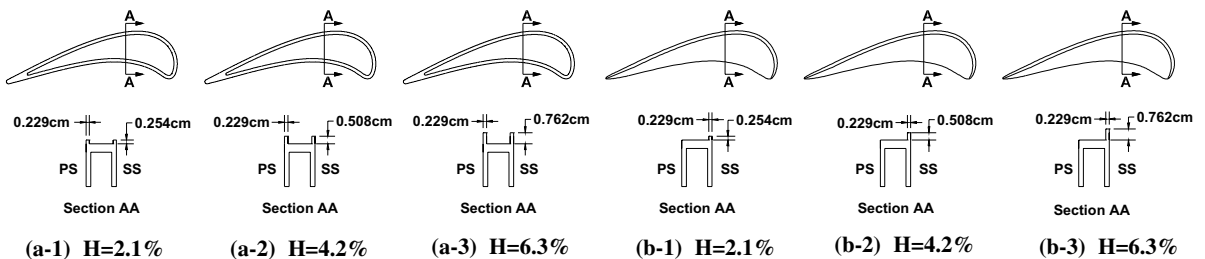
Geometry of rimmed tips: (a) Full side rim; (b) suction side rim.
